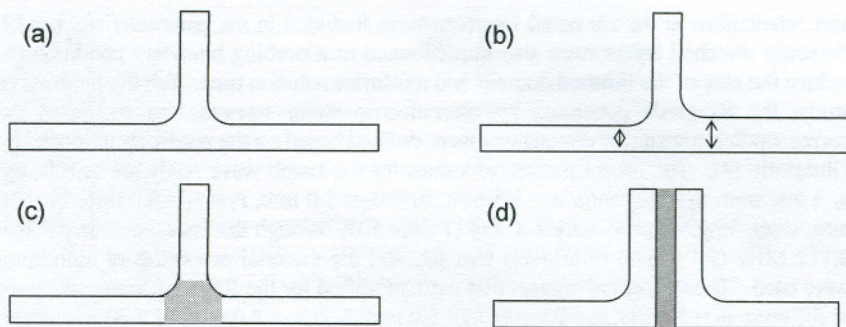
Plate-stiffener structures: (a) extruded panel with rib, (b) machined panel with varying thickness, (c) welded T joint, and (d) bonded composite T-peel joint.
